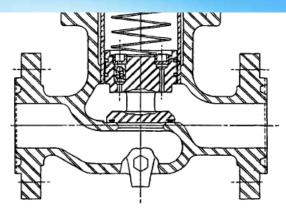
Piston check valve. (Courtesy of Wheatley Pump and Valves, Inc.)
